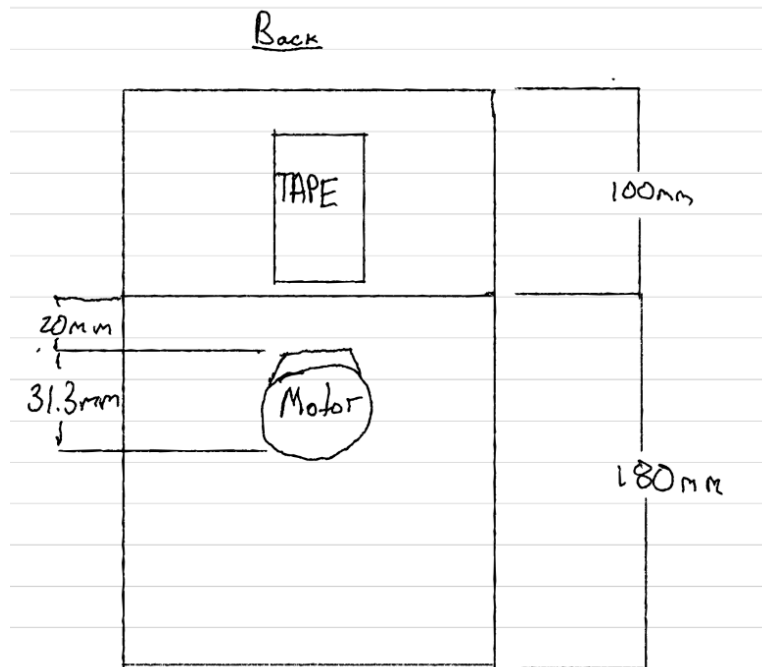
Back view of the housing with the motor attached to the back plate in its respective position.
